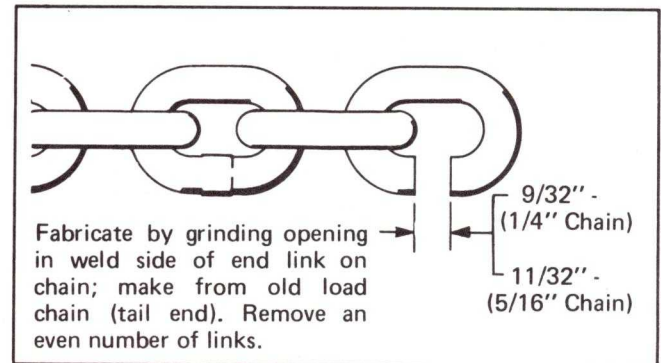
Open "C" Link for Removing and Installing Coil Load Chain
